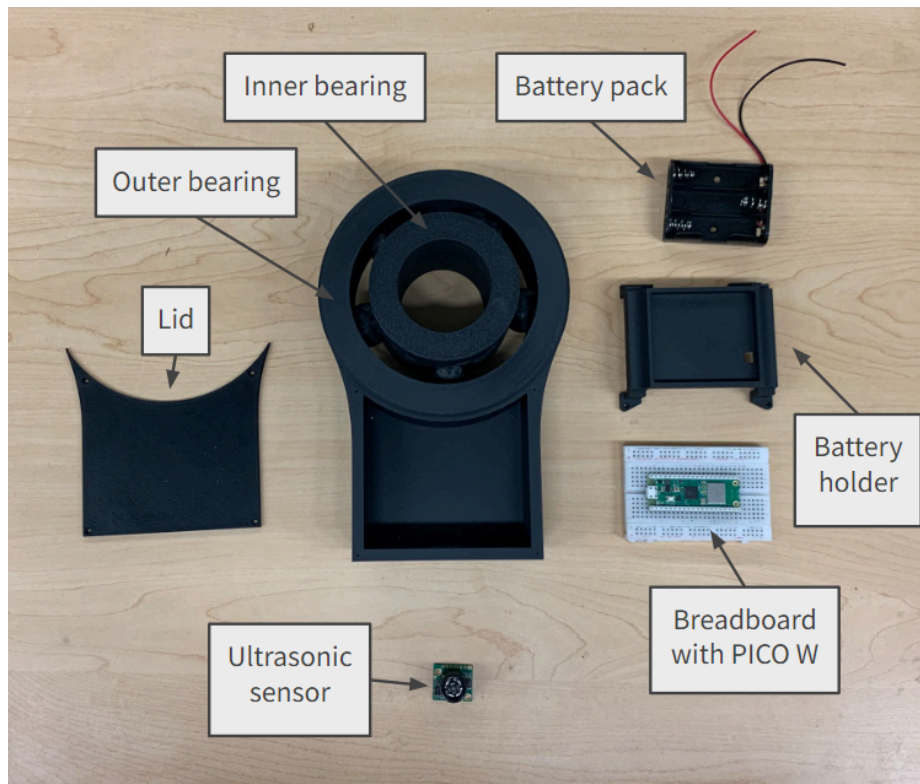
Disassembled components of sensor attachment include an inner bearing component, an outer bearing component, 5 bearing beads, a lid to house electronics, a battery pack, a 3D printed battery holder, a breadboard with connected Raspberry Pi Pico W, and an ultrasonic sensor.
